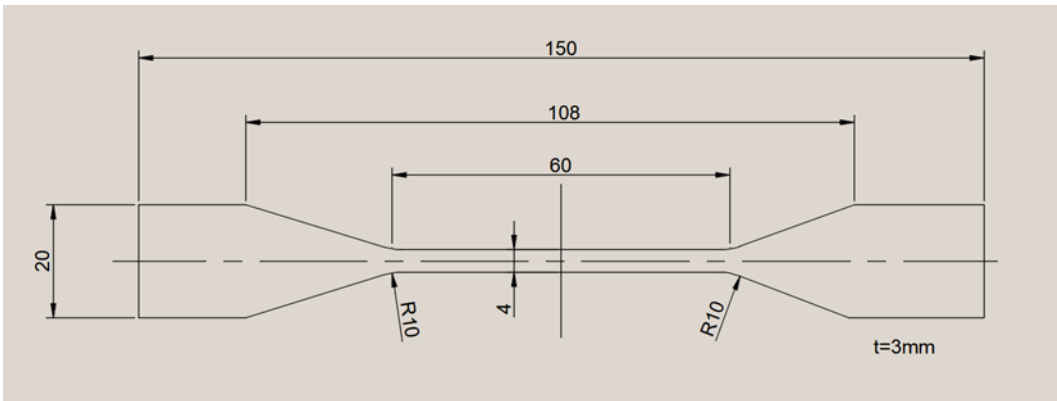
Dimension of dumbbell-shaped test piece made of PE.
